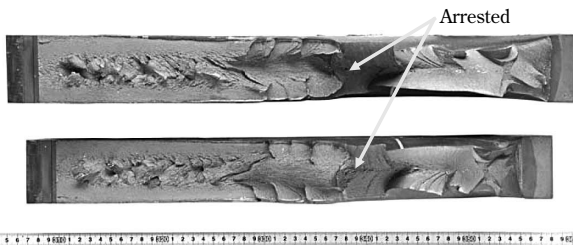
Fracture surface of specimen after ESSO test
